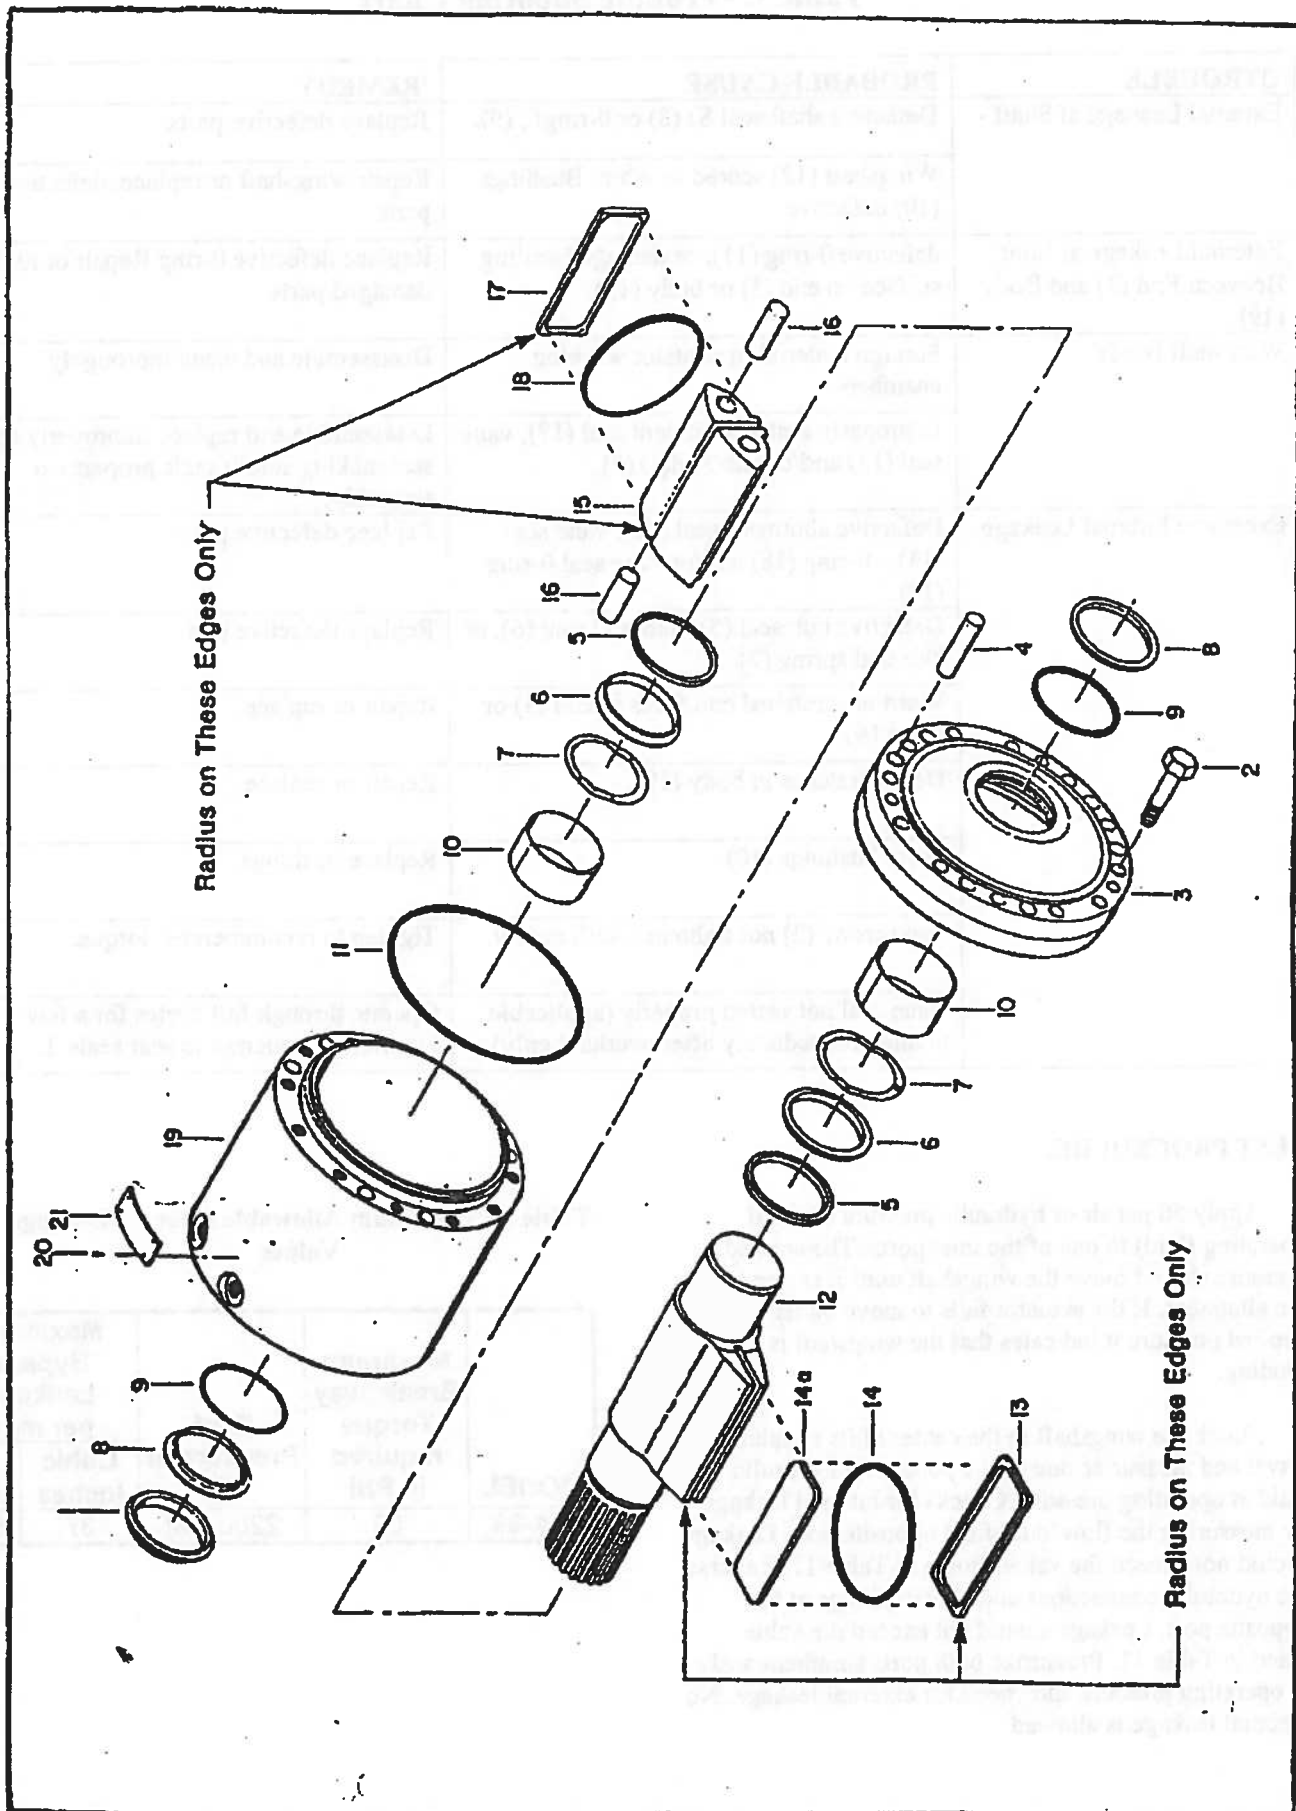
HA 36 Rotary Actuator Assembly, Exploded View
